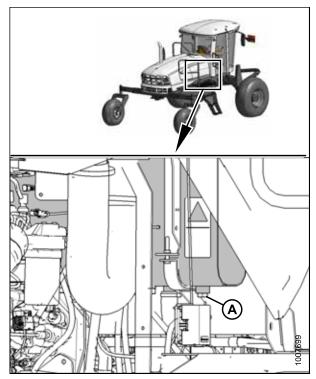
Hydraulic Oil Drain Plug (Some Parts Removed for Clarity)
